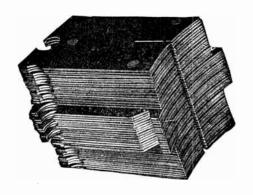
Fort Wayne laminated pole piece before being cast welded into frame. In the faces of solid pole pieces there exist minute electric currents called eddy currents which cause heating of the iron and increase the energy required to maintain a magnetic circuit in much the same manner as does reluctance. This loss is reduced by dividing the magnetic circuit in the line of flux into numerous parallel paths separated by some material of relatively high resistance. In construction, the above core and pole piece is made up of sheets of annealed steel of two different widths assembled together to form proper size and shape. The minute spacing between these laminations and the slight oxidizing on each surface is sufficient to reduce considerably the eddy currents. By cast welding the pole piece into the frame, a low rejuctance is secured.
